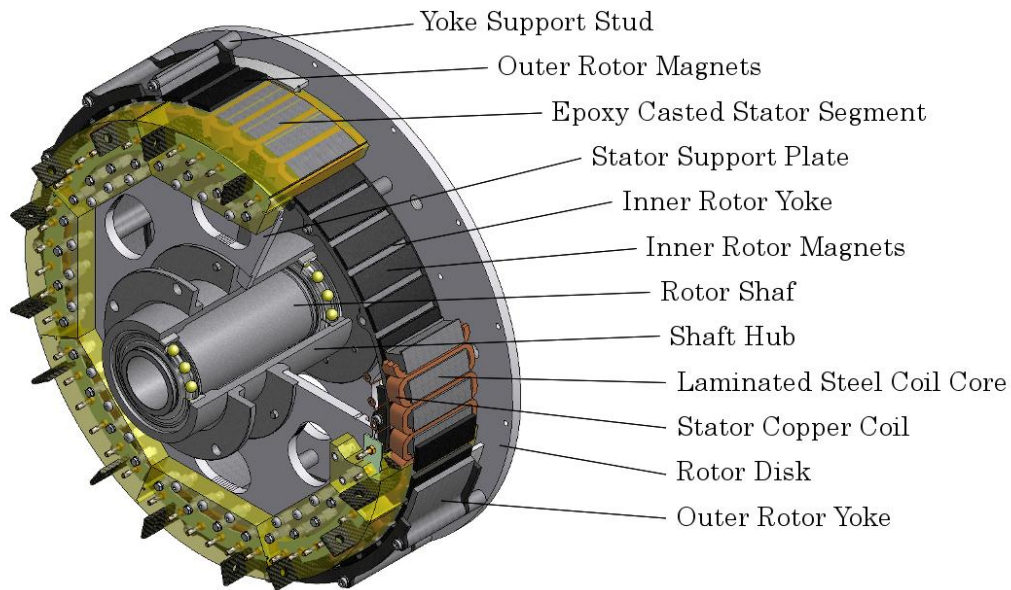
A CAD illustration of the double-sided rotor PMSG and its various parts
